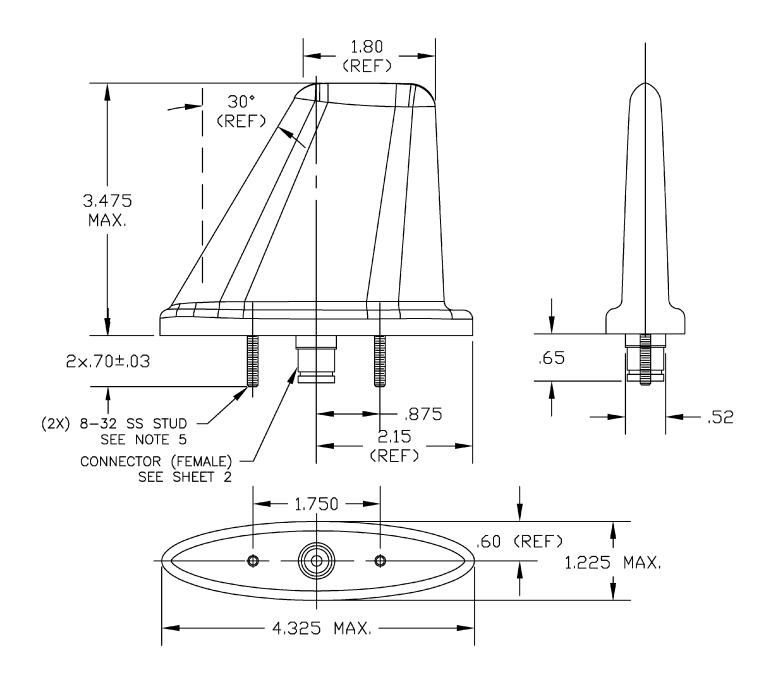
KA 61 INSTALLATION DRAWING (Sheet 1 of 2)
